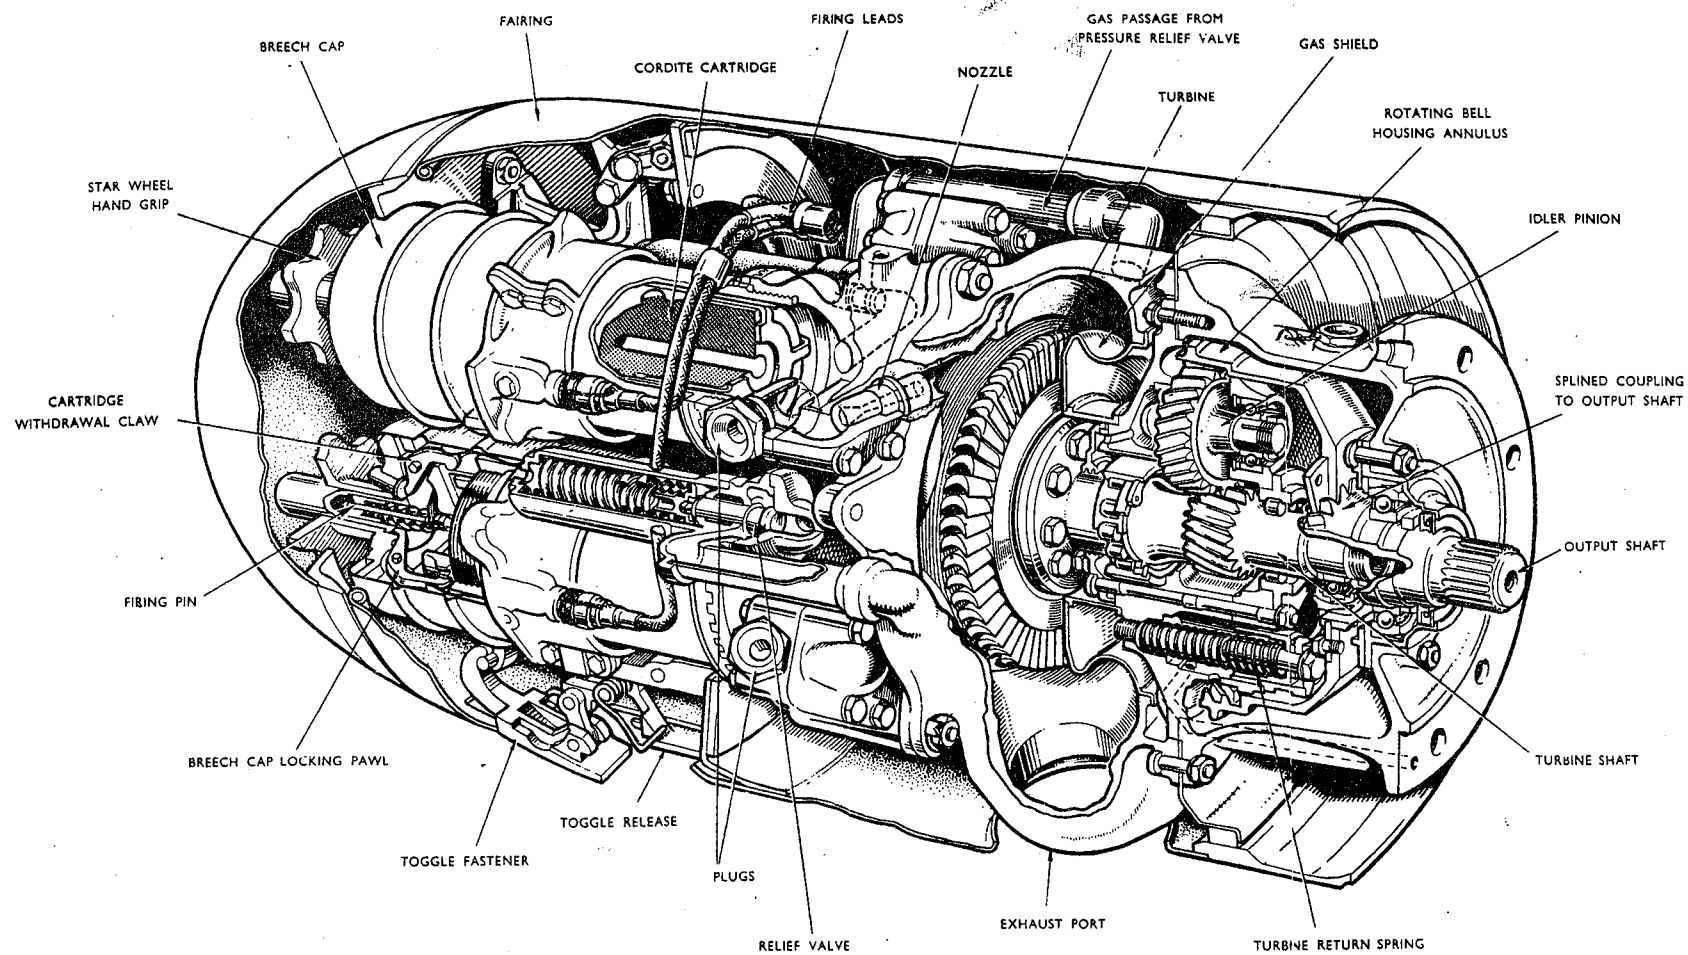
Sectional perspective view of TBS-720 Mk. 2 turbo-starter
